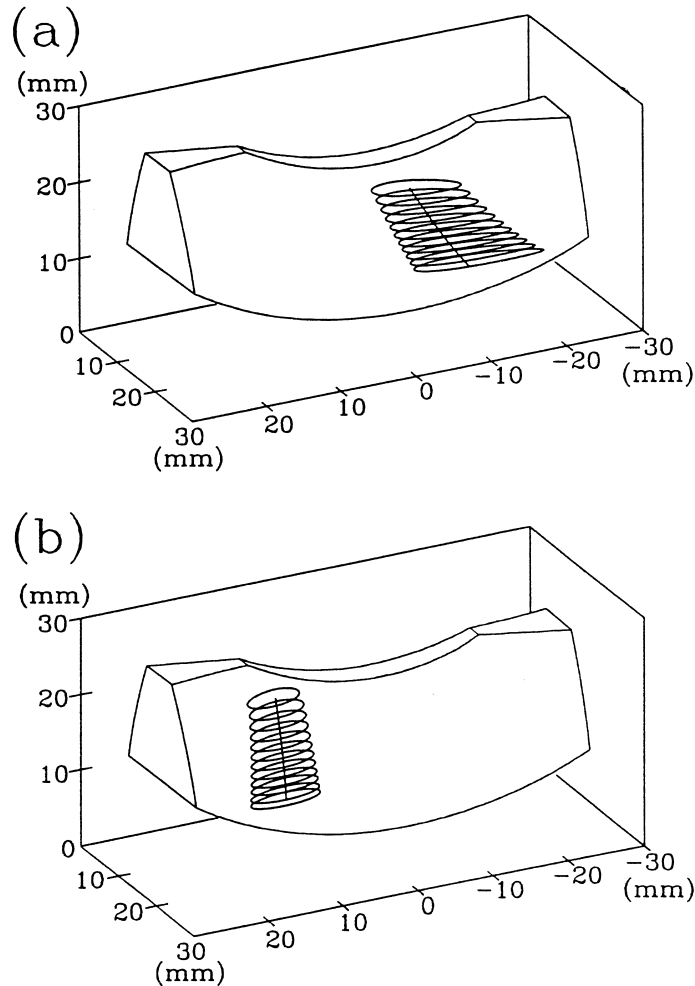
Bearing contacts and contact paths of the ZN-type worm gear set under different axes misalignments.
